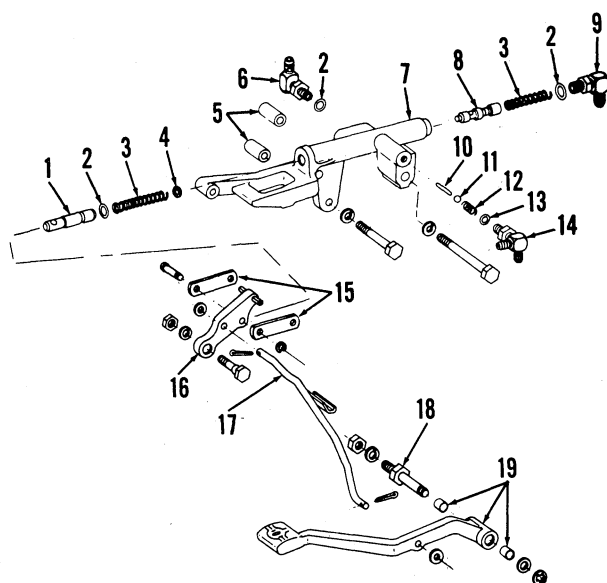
Exploded view of differential lock control valve and operating linkage.
